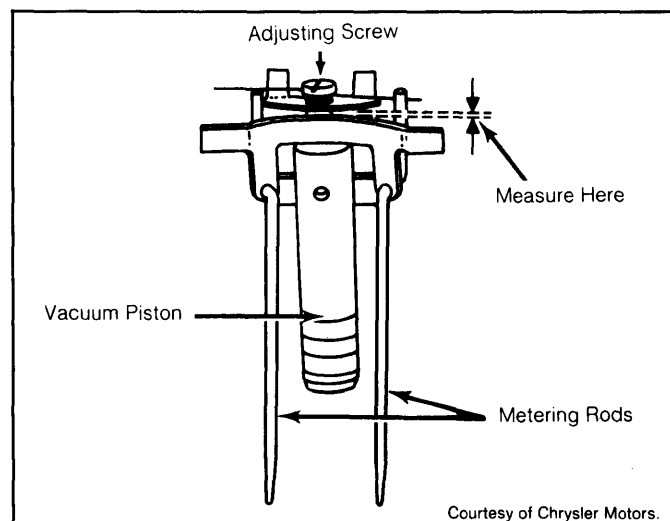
Vacuum Step-Up Piston Gap Qualification
